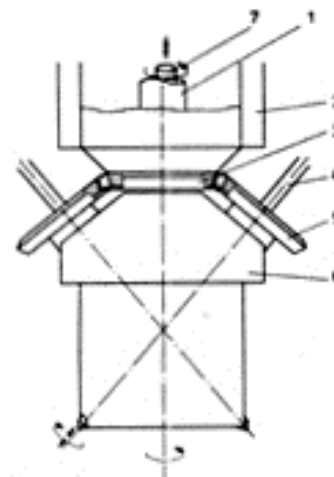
Brass-coating device for cylinder-bushing by boring machine
